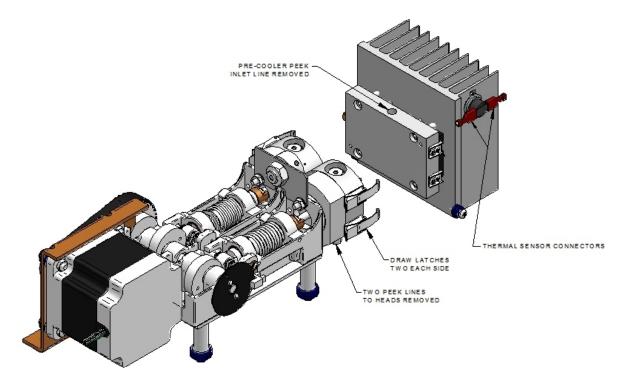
Heatsink/Peltier/Pre-Cooler Removal
